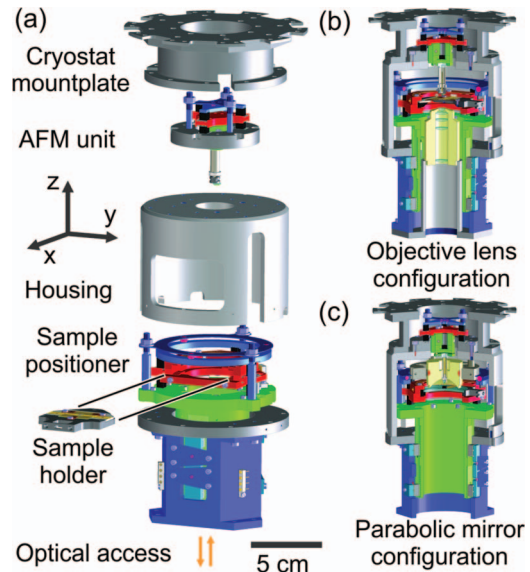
Model of the microscope head. (a) Exploded view. (b) Cross section with mounted objective lens. (c) Cross section with mounted parabolic mirror. Red: components of the piezo positioners moving in the xy -plane; green: parts moving in z -direction; yellow: optical elements; grey: housing.
